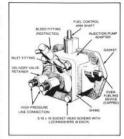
BRYCE/EIGI PUMP AND ADAPTER ASSEMBLY
